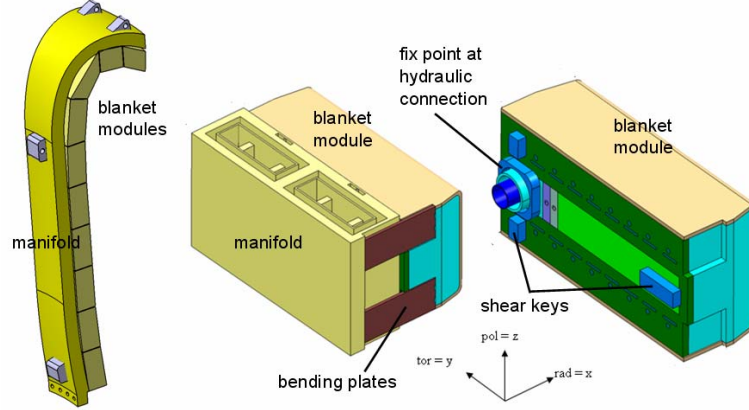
Inboard MMS with blanket modules (left), assembly drawing (middle) and detailed view of connecting elements (right).
